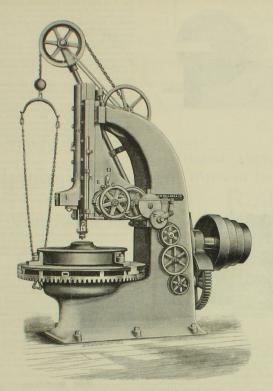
Wm, Sellers & Co.'s New Car Wheel Boring Mill.
